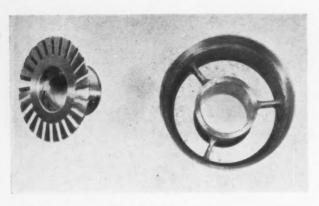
Investment-cast Outer and Inner Components for the Assembly in Fig. 7
